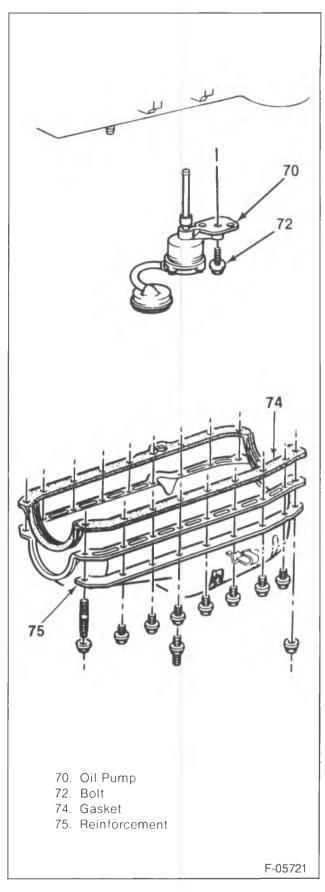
Oil Pan (5.0L and 5.7L Engines)
